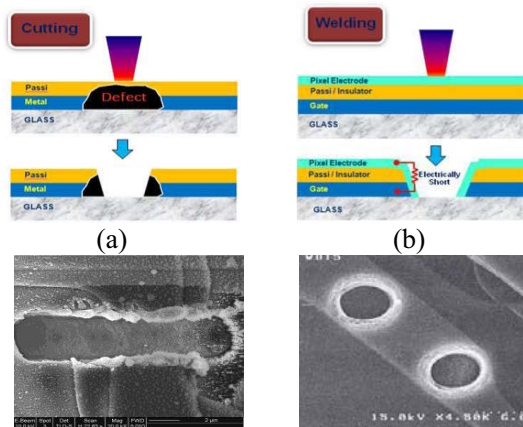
Conventional Cut/Weld repair ; (a) Cutting , (b) Welding.
